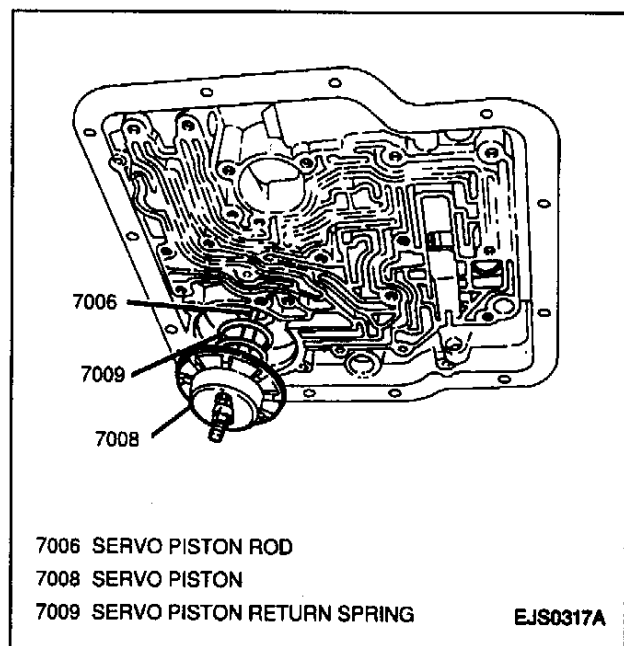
Removing Servo Piston, Return Spring and Apply Rod (3L30, 3-Speed)
